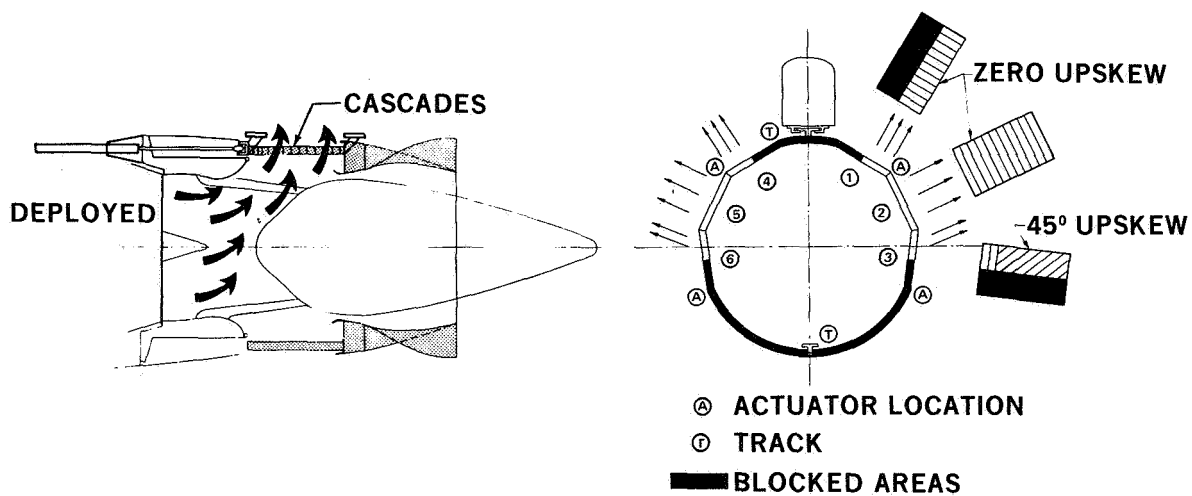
THRUST REVERSER/DAISY EXHAUST ASSEMBLY
